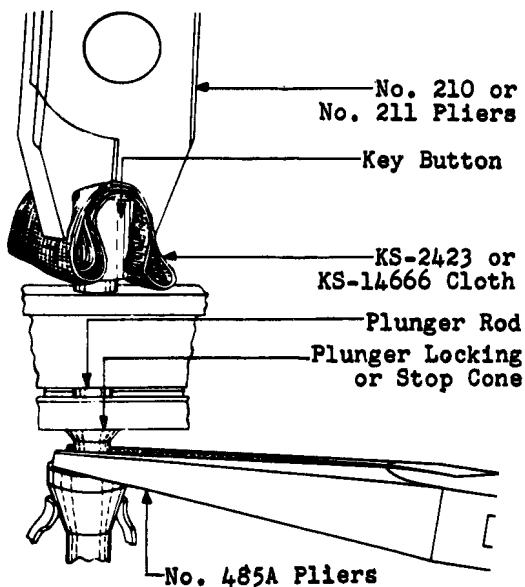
Method of Removing Plunger Buttons From Plunger Units Not Equipped With Locknuts
